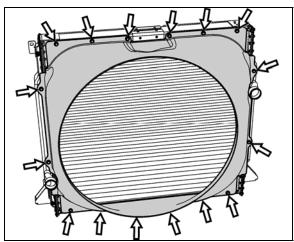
REMOVING FAN SHROUD FROM RADIATOR
